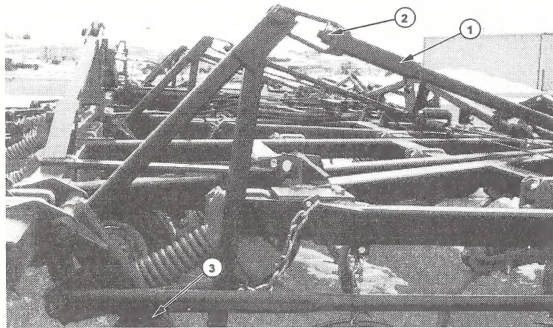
Adjustor Link Assembly. (1) Wheel Standard Link, (2) Adjusting Bolt and (3) Wheel Standard.
